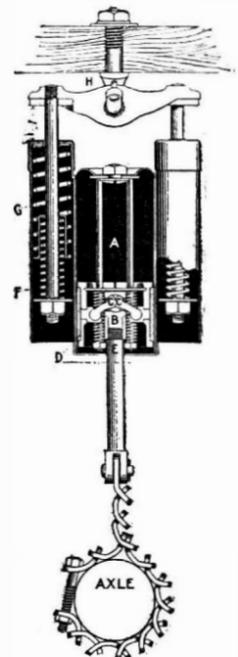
View Showing the Combined Spring Recoil and Friction Check Partly in Section.
